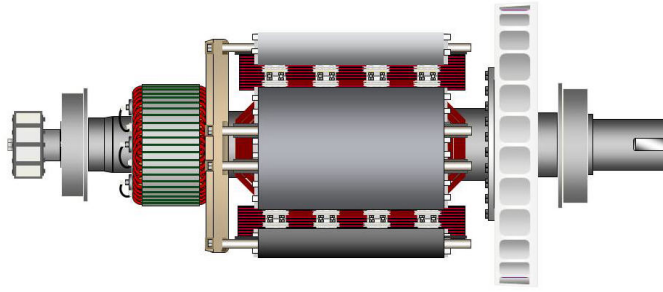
TWO BEARING ALTERNATOR ROTOR SHOWING SHAFT WITH KEYWAY FOR FLEXIBLE COUPLING (AT RIGHT)
